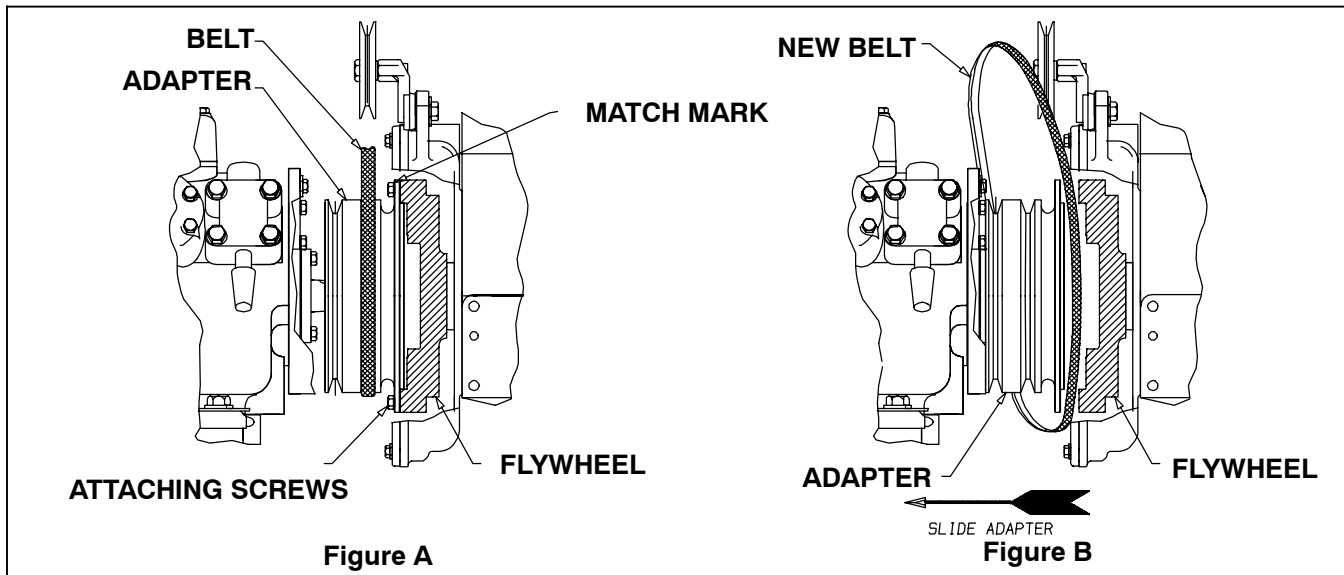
Removing V-Belt from Engine Adapter Drive Sheave
